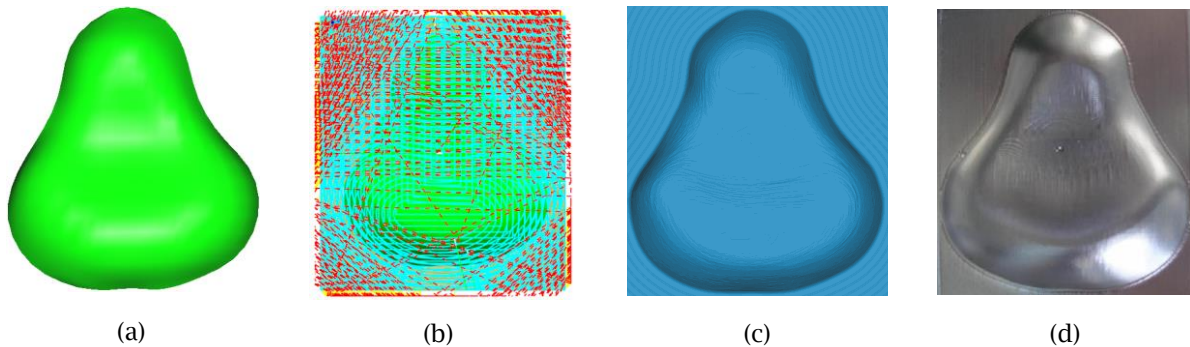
Example of wrap-like free-form surface reconstruction and machining: (a) CAD model obtained by the proposed method. (b) Tool paths generated in CAM module of UG 7.5. (c) Machining simulation. (d) The machined part.
